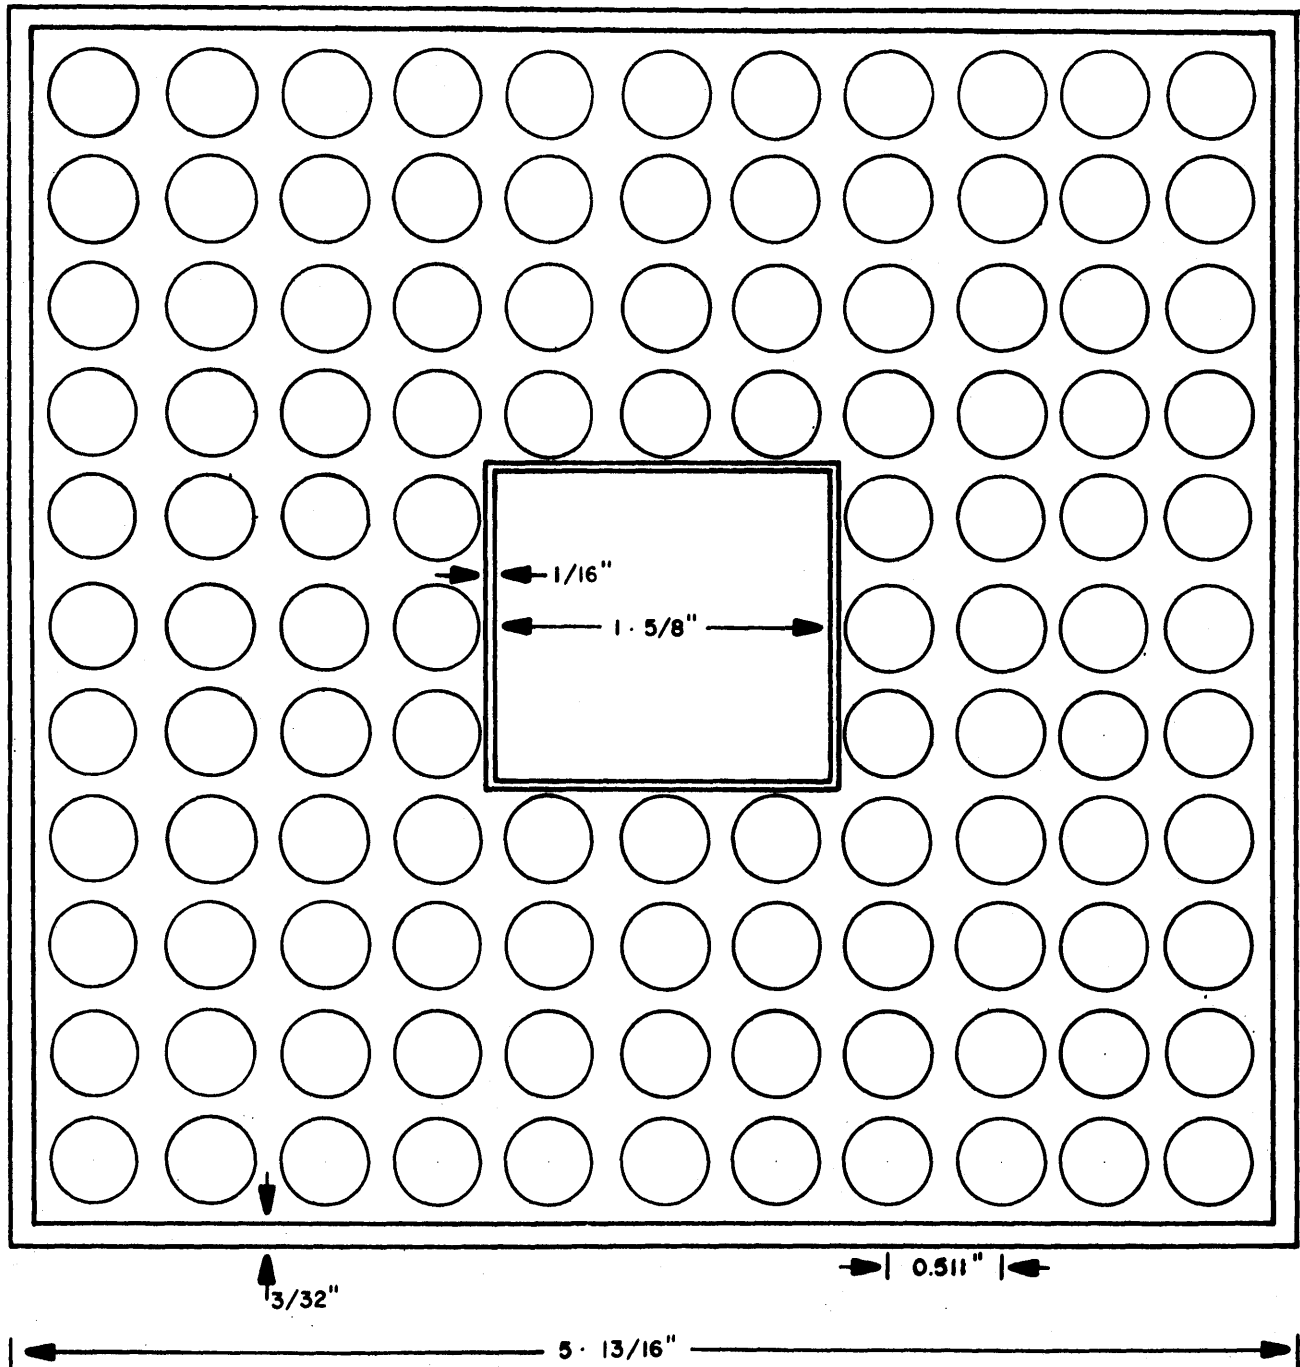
PLAN VIEW OF BLANKET ASSEMBLY SHOWING THE TEST SUBASSEMBLY POSITION
